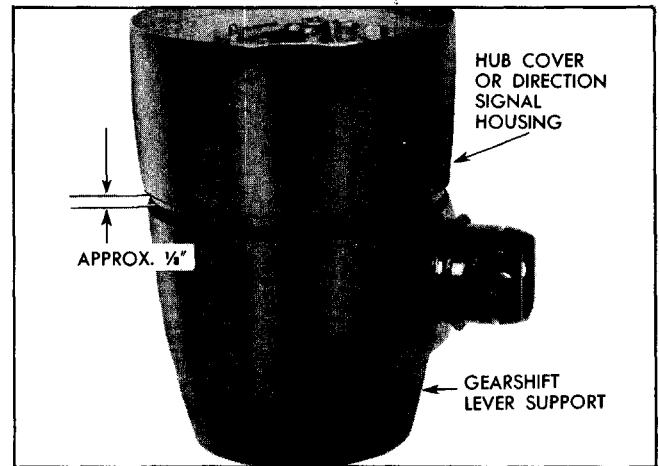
Clearance Between Lever Support and Directional Signal Housing
